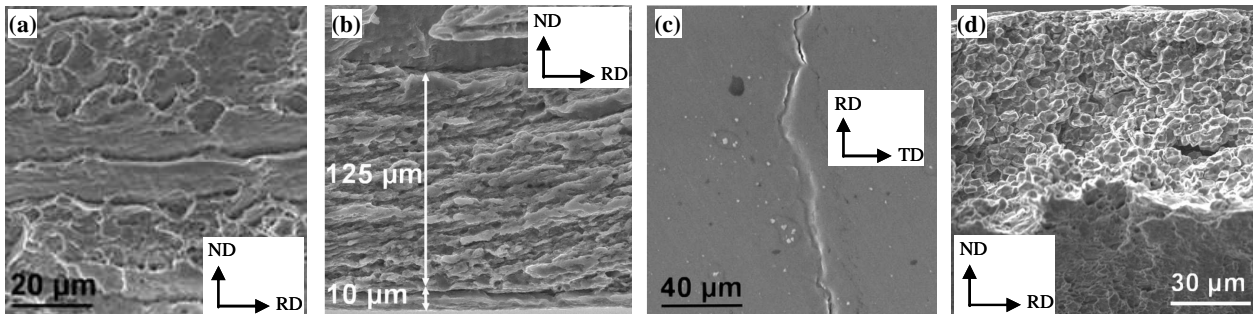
(a,b,d) fracture surfaces (a) in the TMAZ (sound and JLR bearing welds), (b) of a KB bearing weld (the striated zone corresponding to the KB defect itself) and (d) close to the root of a Gap7 weld. (c) Onset of cracking at the lower surface of a KB bearing specimen, slightly polished and then pulled in tension in the SEM (loading axis horizontal)
